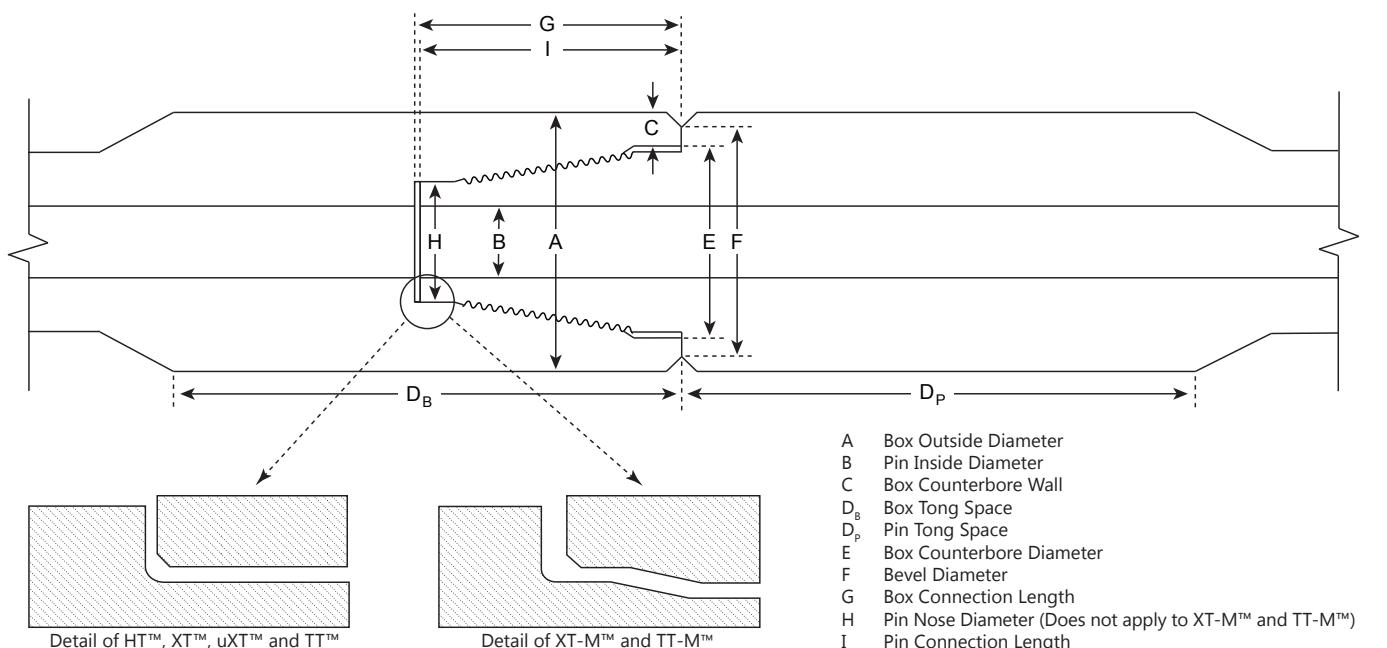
Tool joint dimensions for Grant Prideco HI TORQUE™, eXtreme™ Torque, uXT™, XT-M™, TurboTorque™, TurboTorque-M™, and Delta™ connections.
